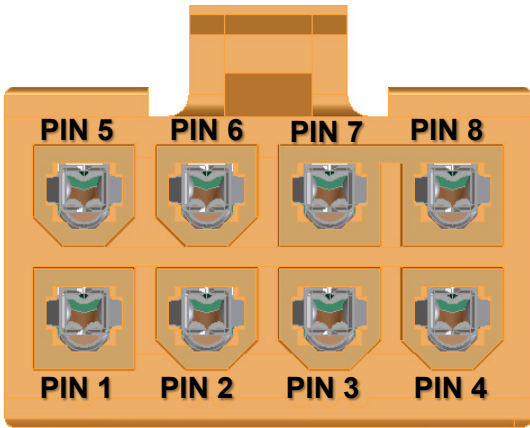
2 x 4 Auxiliary Power Connector Plug Side Pin-out
